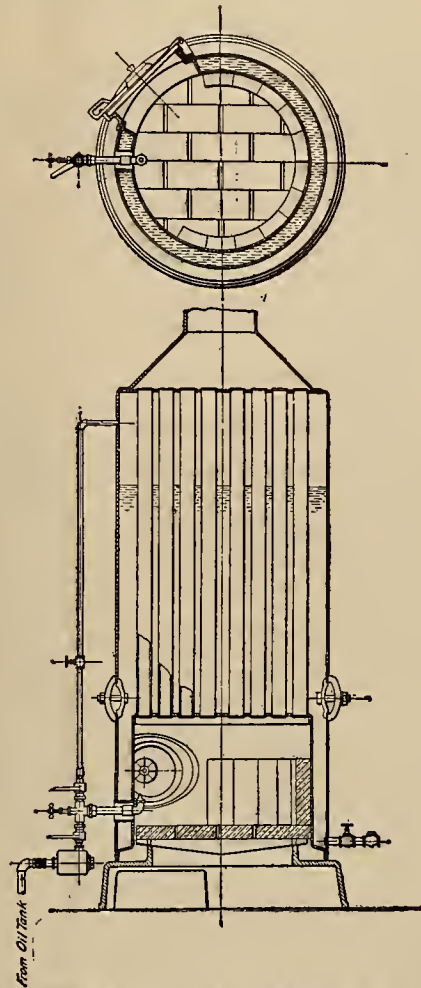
Wilgus Burner Arrangement for Upright Boiler.
